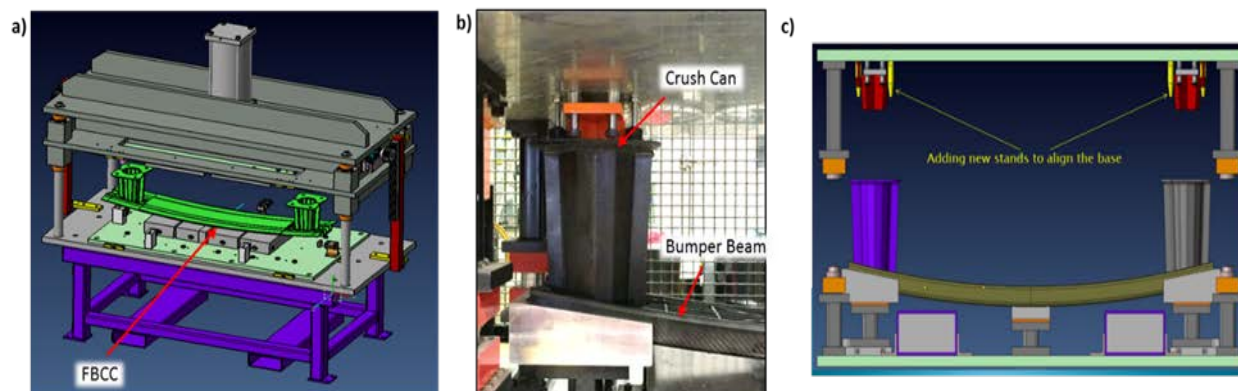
The fixture used to join the assembled crush can and bumper beam. (a) Schematic of the press and fixture showing the location of the FBCC. (b) A photograph of the actual FBCC components in the press. (c) Pins were added to the fixture to ensure alignment of the holes for mounting the FBCC to the crash-test sled.
